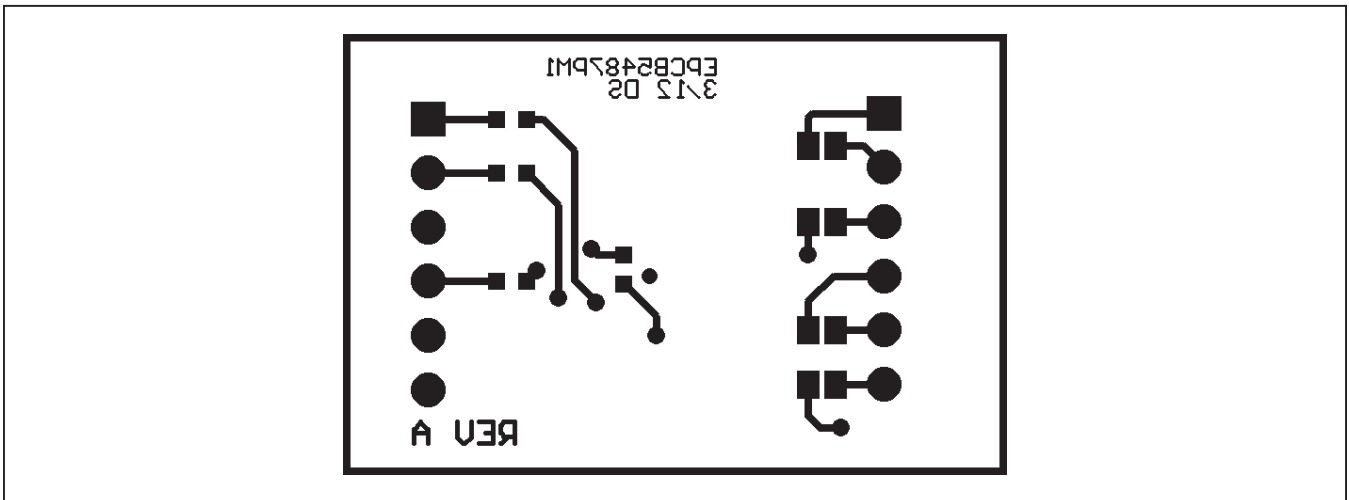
MAX5487PMB1 Peripheral Module PCB Layout—Solder Side
